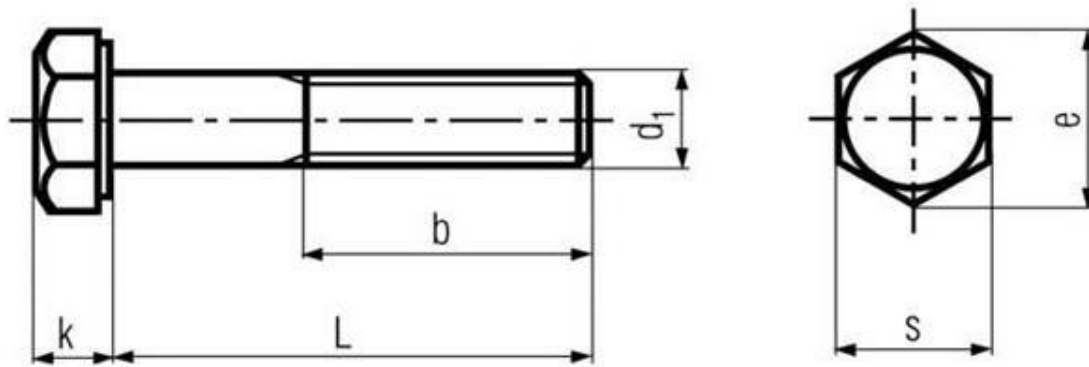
2D drawings of the hex bolt with dimensional descriptions
